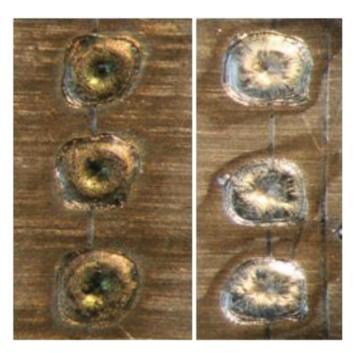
Configuration of welding points: welding is executed in the open atmosphere (a), welding is executed in a low vacuum (b).
